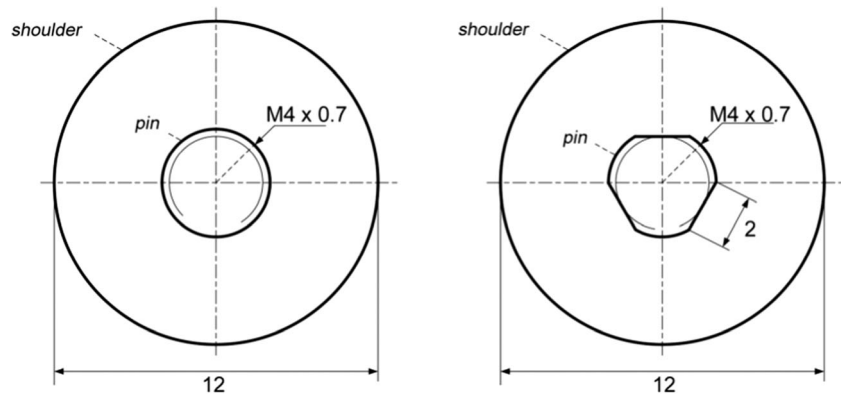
Schematic illustration of the welding tool geometries [63]
